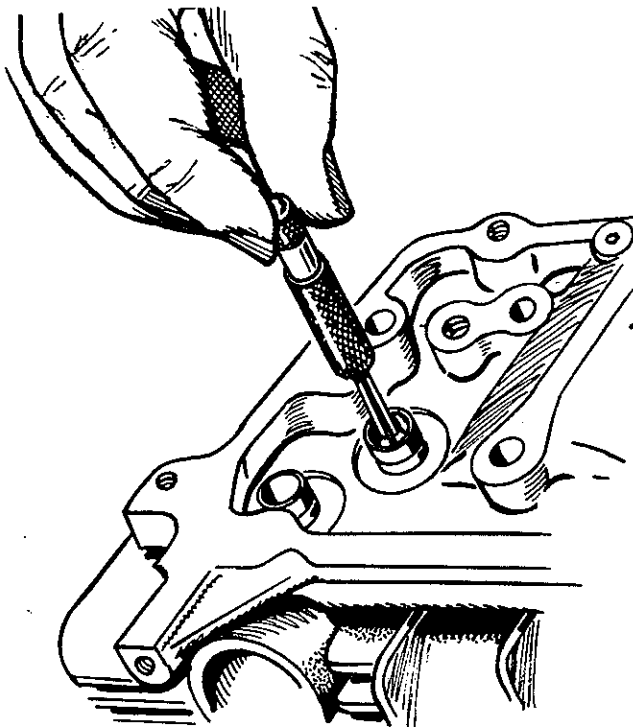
MEASURING VALVE GUIDE INNER DIAMETER
